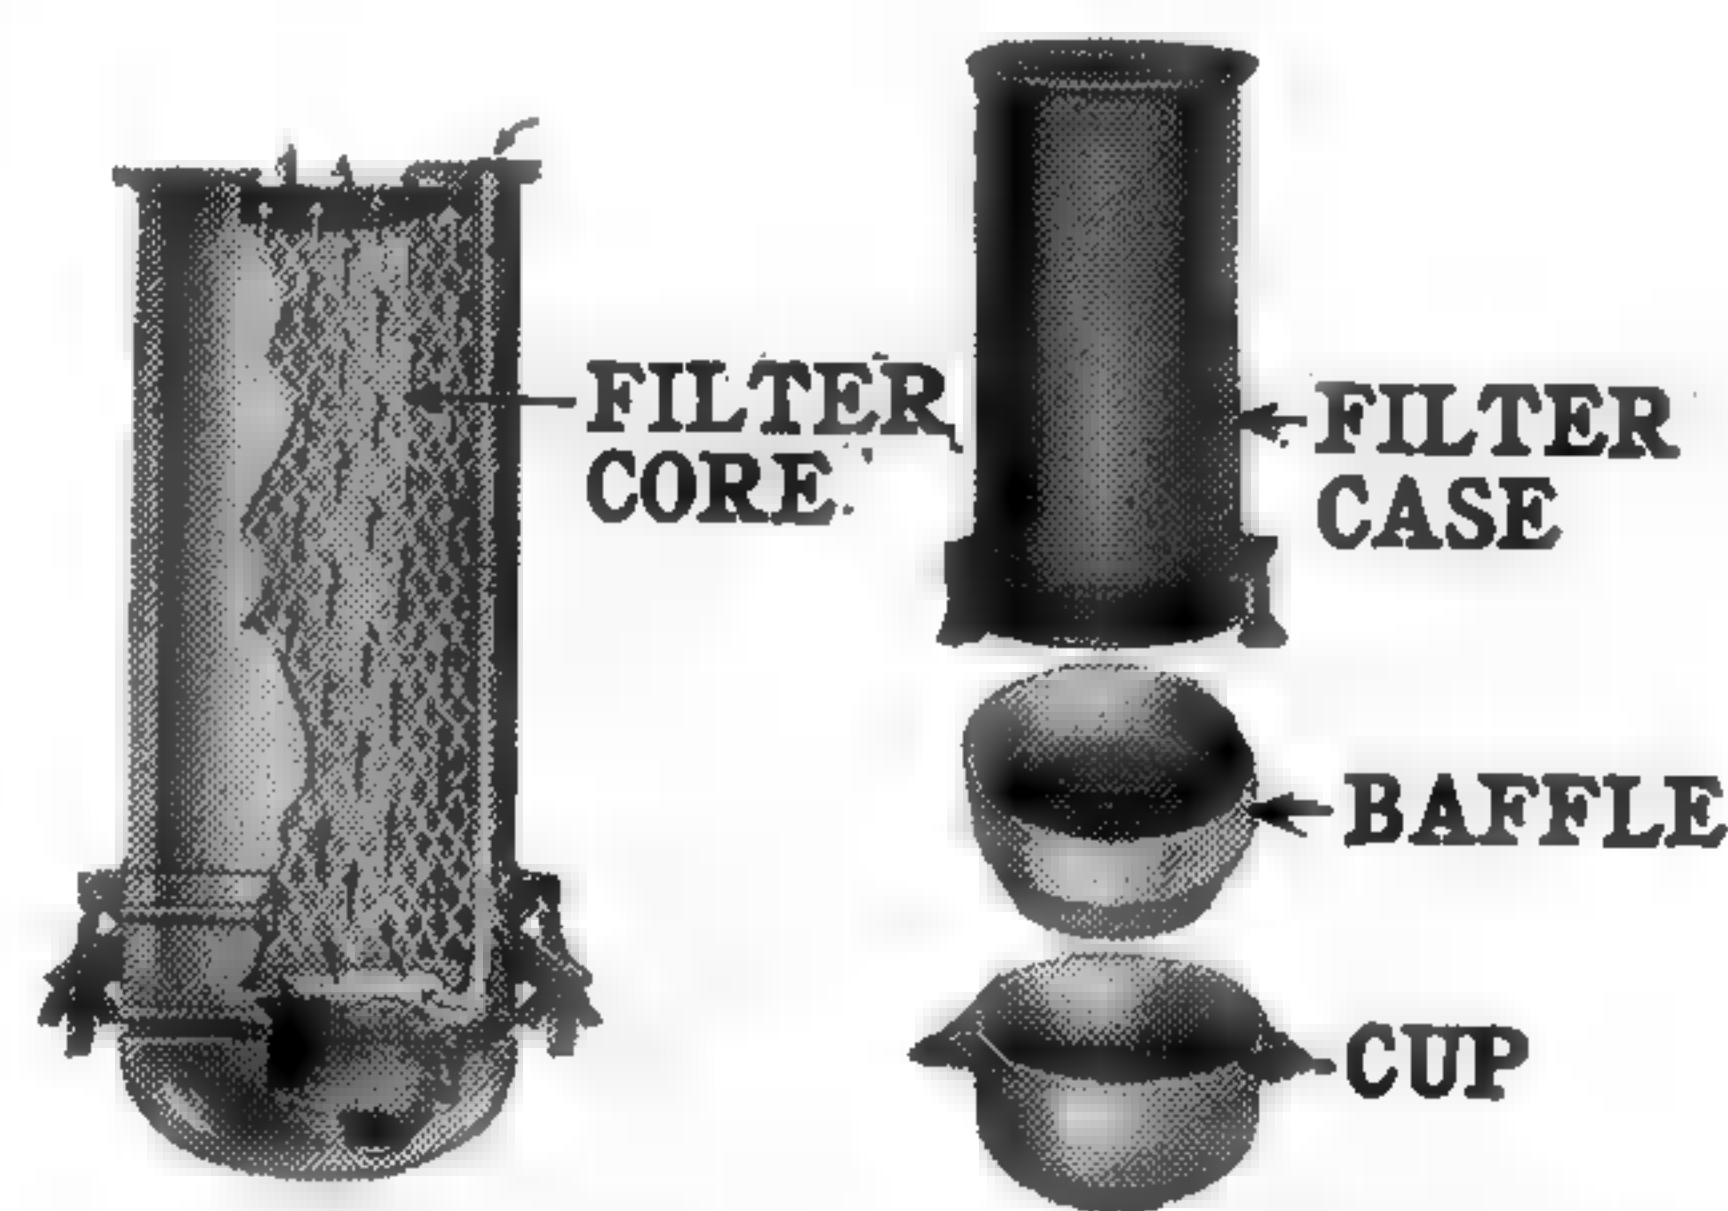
Air cleaner shown in cross-section disassembled for servicing.
